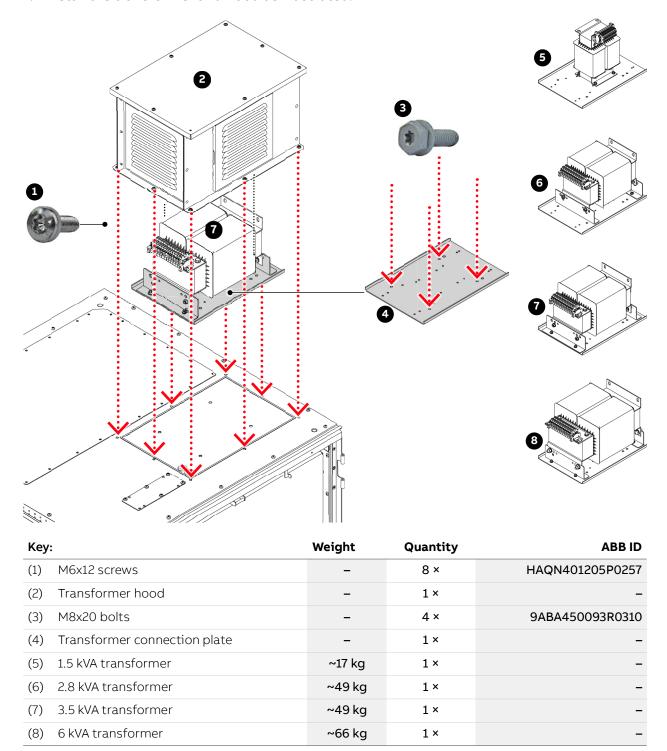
Installation example of transformers in an air-to-air heat exchanger
